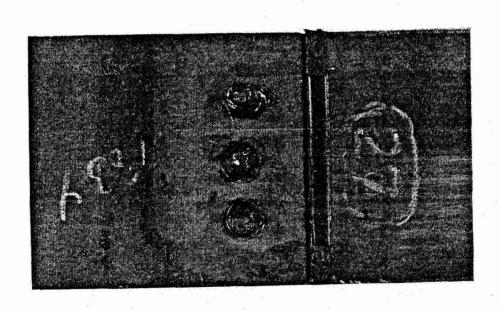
LCM 2180 Sealant Joint Static Tensile Failure. Holes are Maximum Size. Note Rupture of Fillet Seal on Left Photograph.
